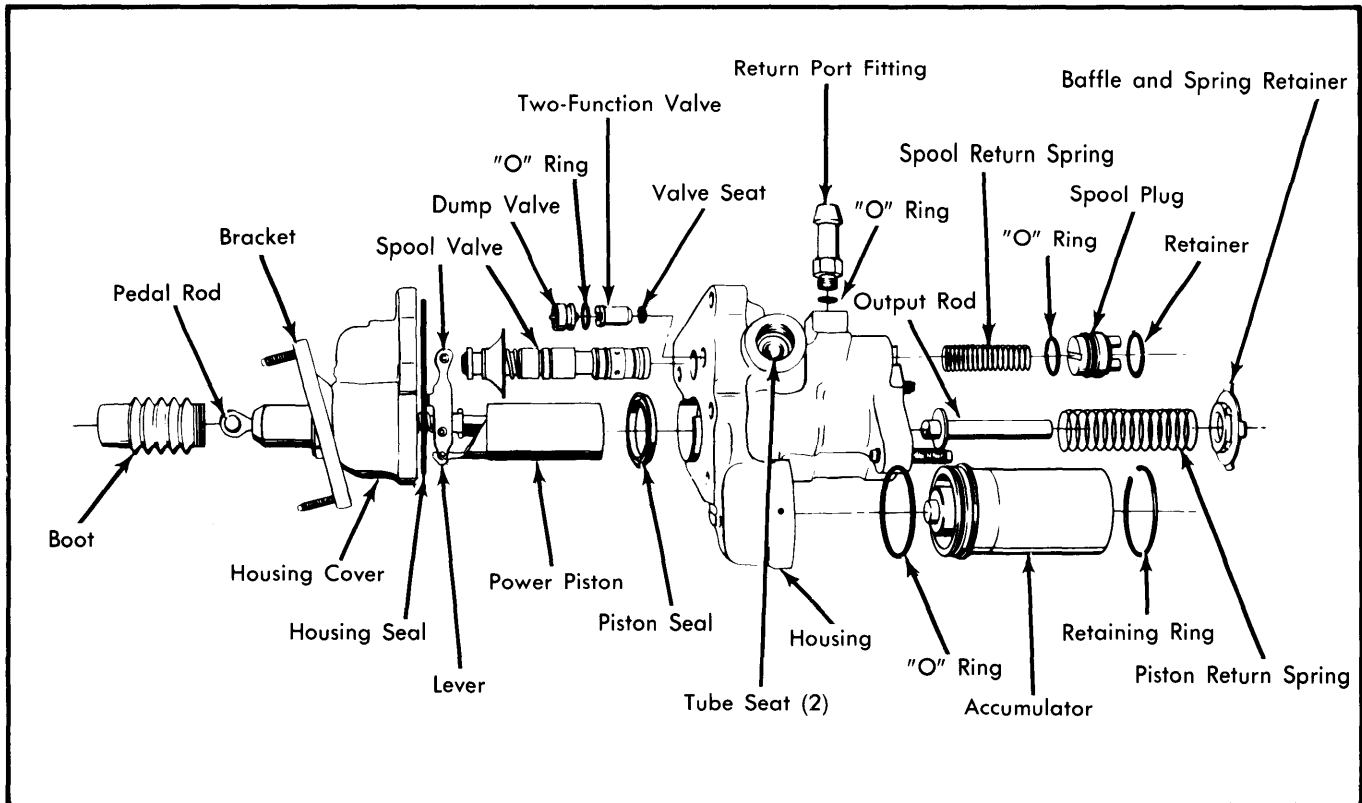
Exploded View of Bendix Hydro-Boost Assembly Components (Unit with External Accumulator Shown)
